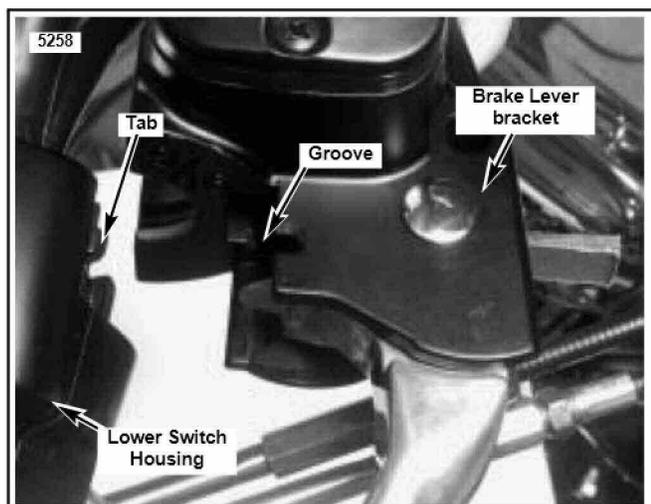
Brake Lever / Master Cylinder fit to Right Handlebar Lower Switch Housing
